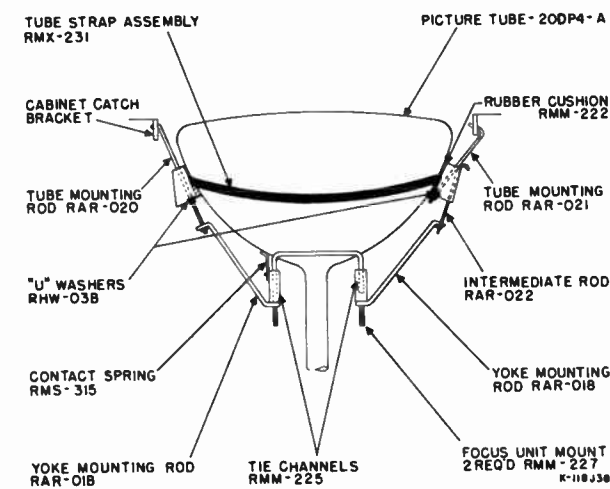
Picture Tube Assembly, Model 20C107 (Top View) (Yoke and Focus Unit Not Shown)
